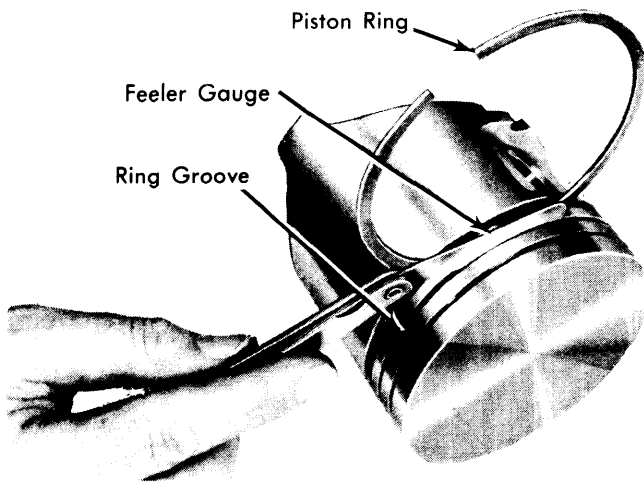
Using Feeler Gauge to Measure Ring Side Clearance
